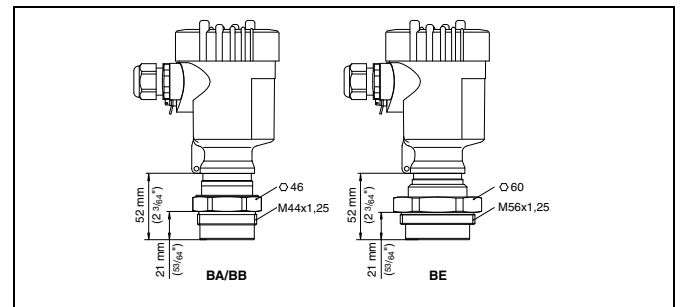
VEGABAR 64 - threaded fitting for the paper industry: BA/BB = M44 x 1.25; BE = M 56 x 1.25
